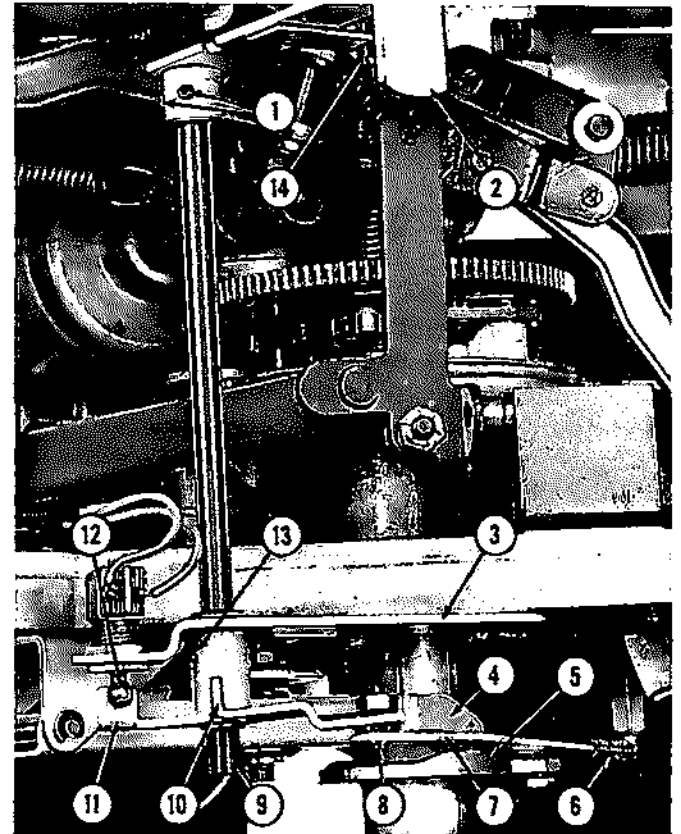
RECORD LOADING LEVER ADJUSTMENT
